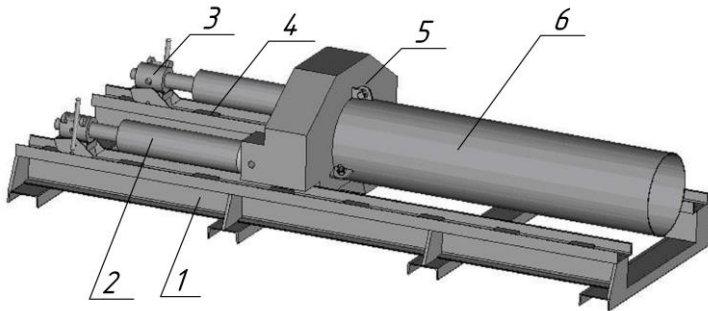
General view of the auger-boring machine's support-guide system in the initial position: 1- modular multipart frame; 2- hydraulic jack; 3- movable thrust shoes; 4- fixed stops of the modular frame; 5 - power frontal part of the running carriage; 6- casing pipe's sectional column.
